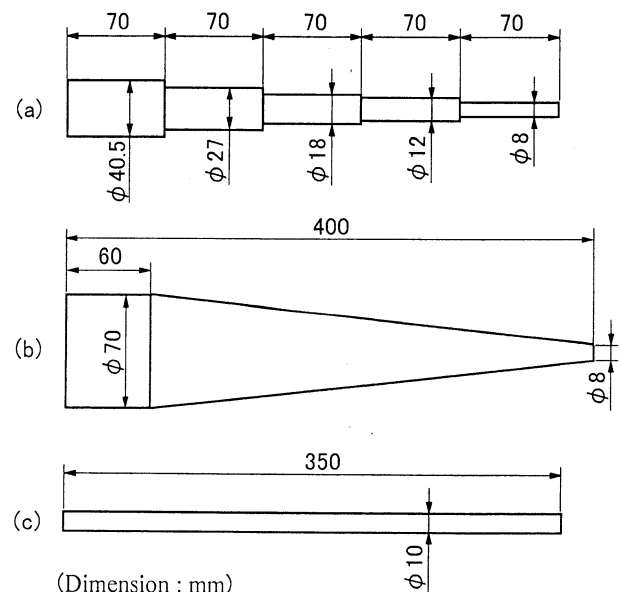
Shapes and dimensions for 5-stepped (a), tapered (b) and uniform (c) striker bar.
